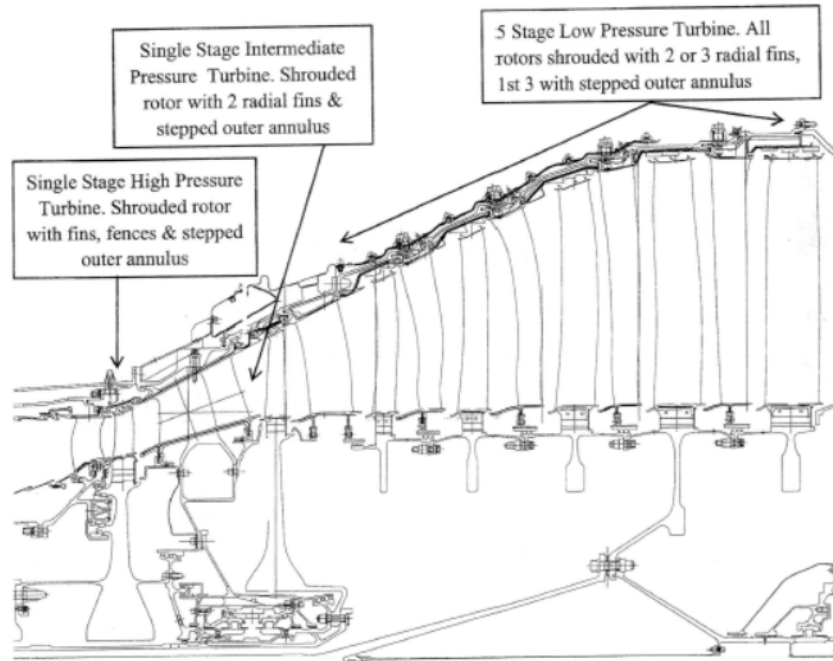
Sketch of an aeroengine turbine section with a shrouded HP rotor [8]
